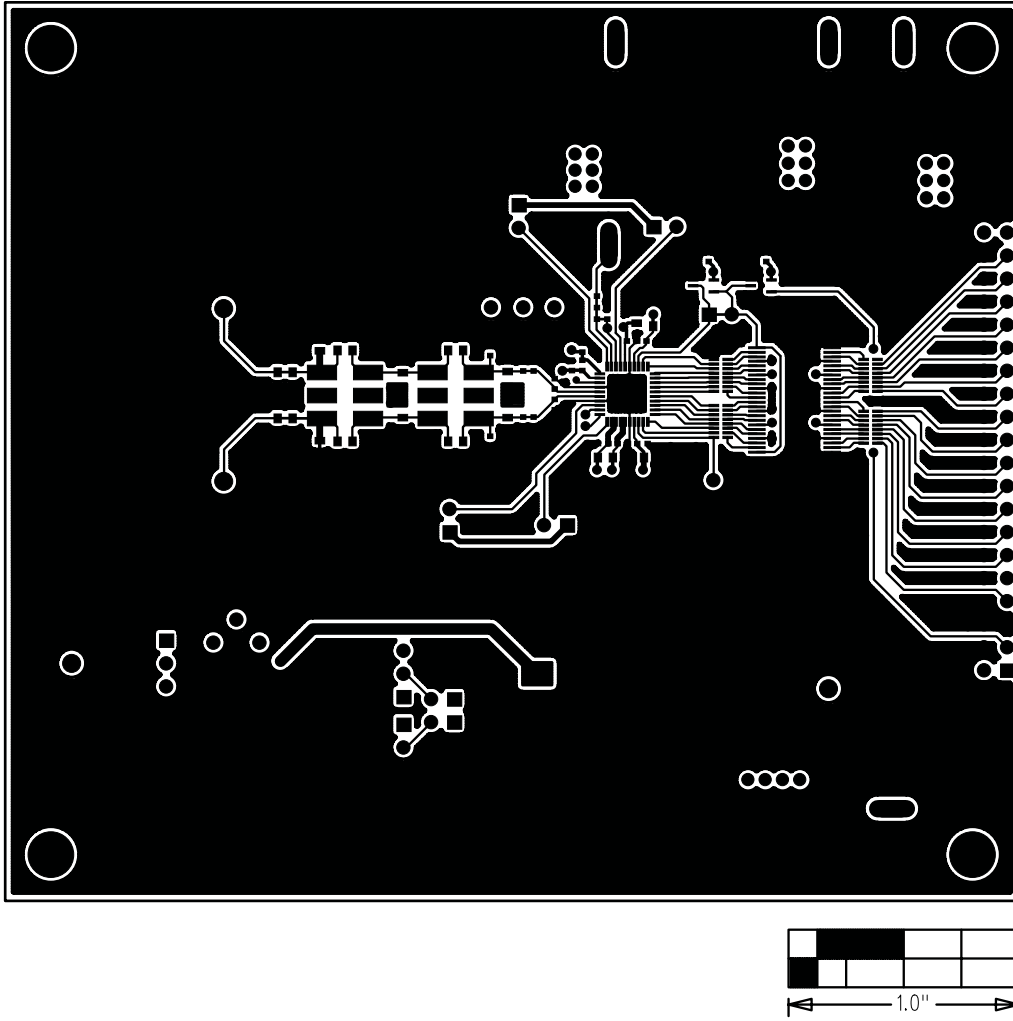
MAX12553/MAX12554/MAX12555 EV Kits PCB Layout—Component Side
